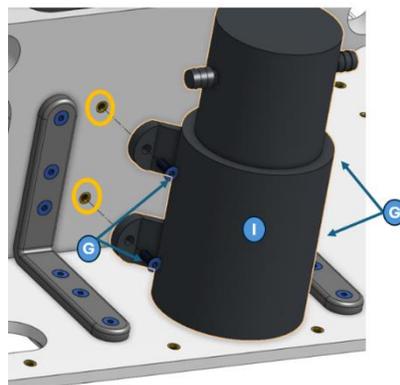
Mounting the Water Pump to the LCG Bladder Compartment.
